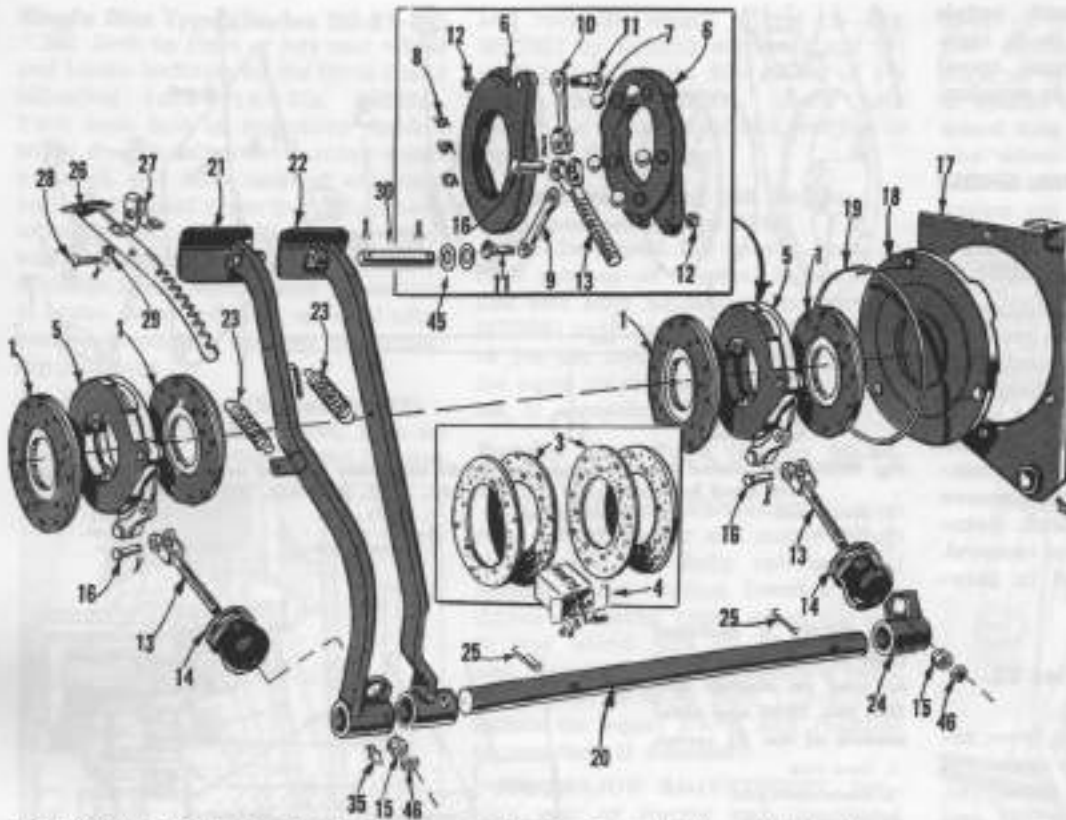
Exploded view of series 44 double disc type brakes. The left brake is accessible after removing plate (17). The right brake can be removed after removing the power take-off clutch.
